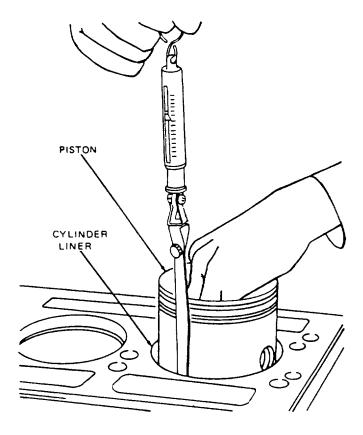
Measuring Piston-to-Liner Clearance Using Tool J5438-01.
